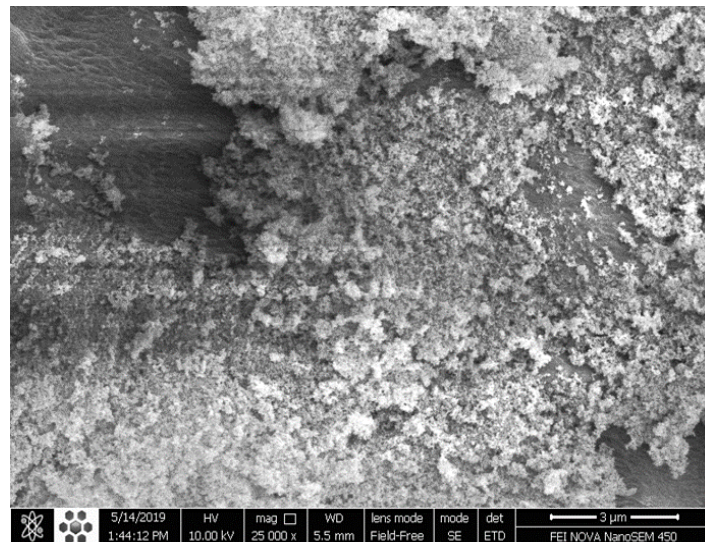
SEM image from fracture surface after tensile testing for the joint fabricated with 2.4 g nano-silica and 400 rpm of tool rotation speed
